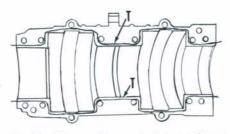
After applying sealant to crankcase lower half, lay a cotton thread (T) inside bolt holes as shown.
